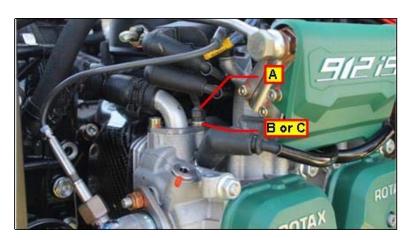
Example of element replacing intake manifold fastener. Alternate cylinder head location on carbureted Rotax engines. Location does not use spacers or washers unless required to keep element from bottoming out.
